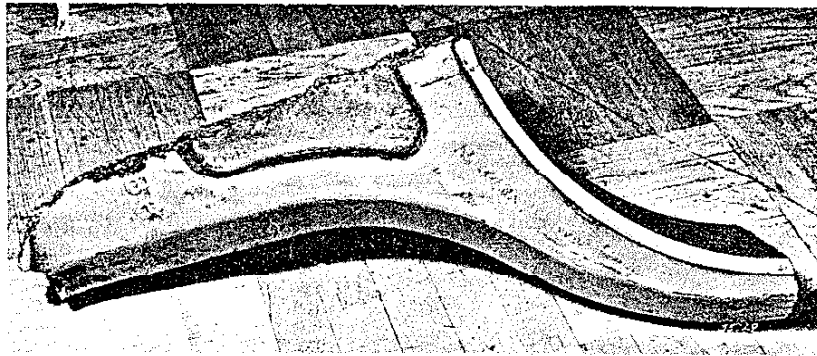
Fracture in Cast Connecting Rod for Large Press. Numerous small cracks developed in the bushing seat after 2 years of service. (See Fig. 18 also)
